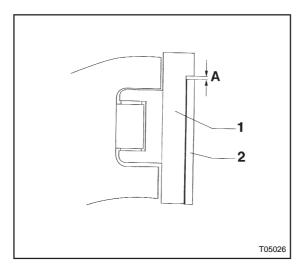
Mirror support arm (1) and base plate (2). Dimension "A" should equal 1/4 inch.
